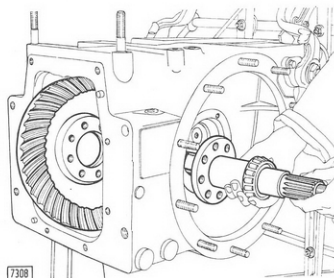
Withdrawing the Shaft and Crown Wheel Assembly
